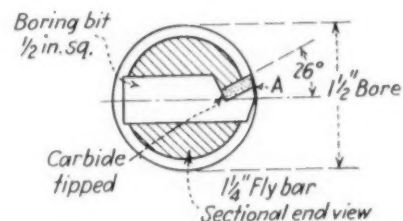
The tool illustrated in Fig. 2 is shown mounted in a boring bar for performing a job similar to that of Fig. 1.
